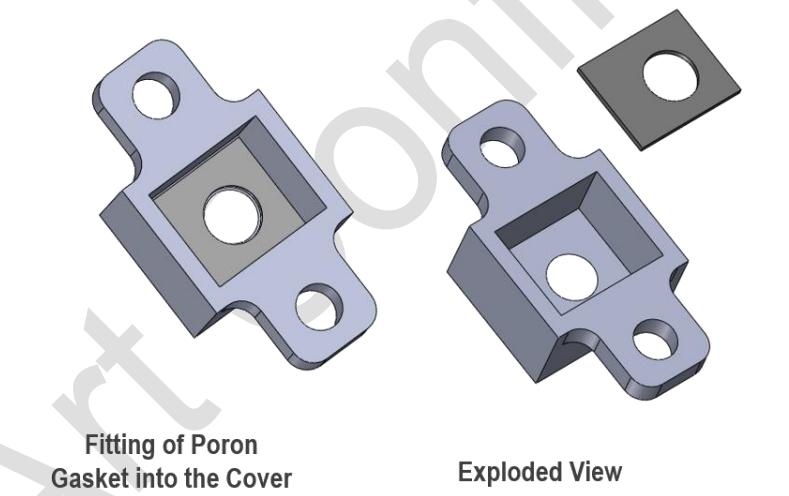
Exploded View of the Poron Gasket with the Lens Holder
